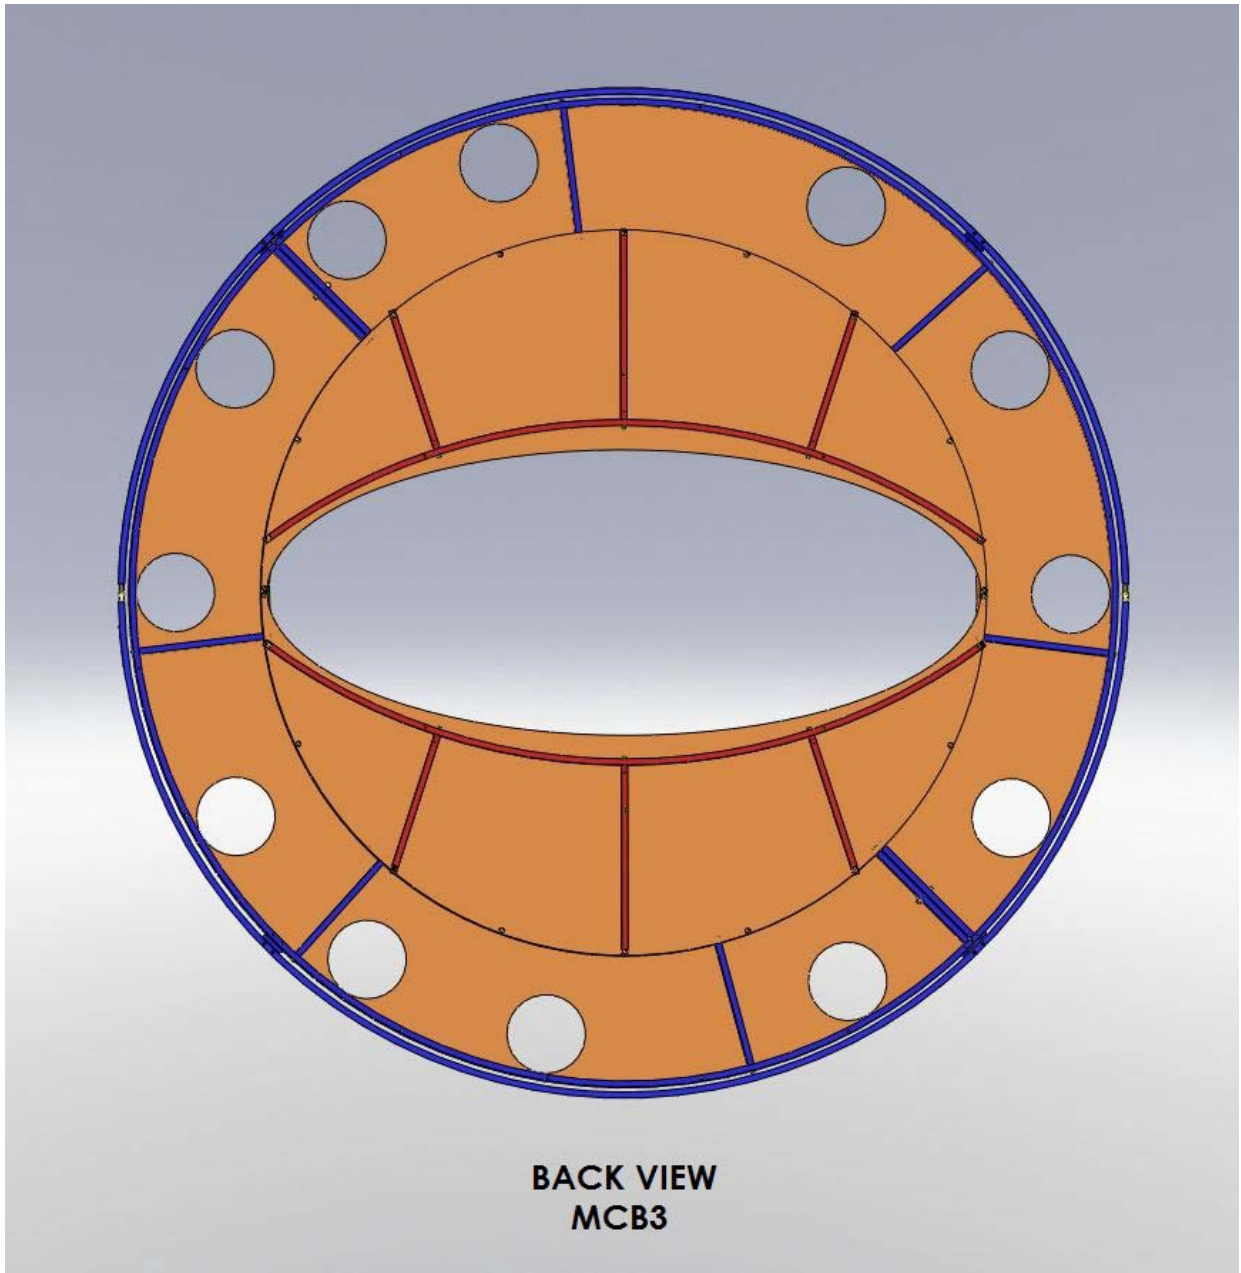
Back View of MCB3 Mode Cleaner Tube Baffle
